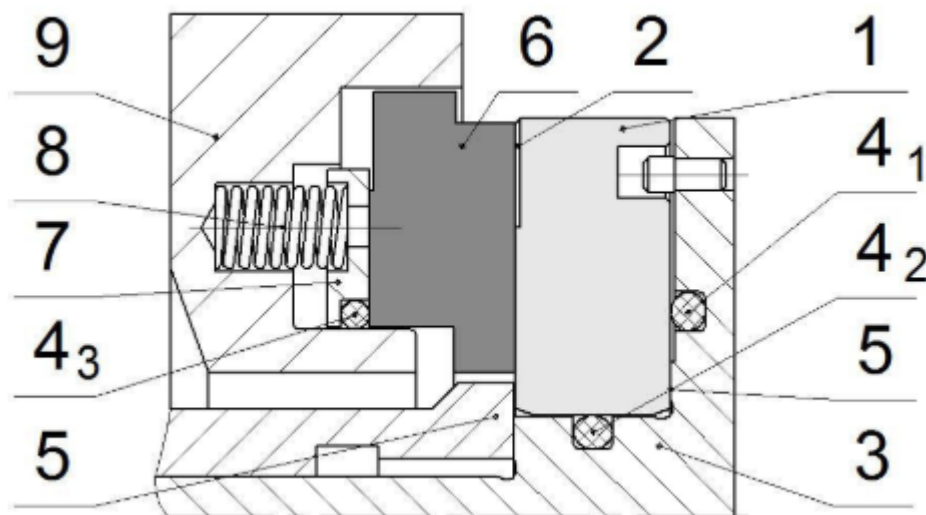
Schematic of dry gas mechanical seal. 1: carbide ring; 2: spiral grooves; 3: rotor; 4: elastomeric rings; 5: sleeves on the rotor; 6: graphite sealing ring; 7: spring follower; 8: spring; 9: stator [6].
